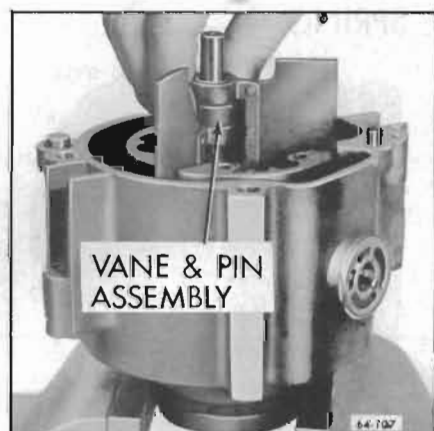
Installing Vane and Pin Assembly in Rotor
